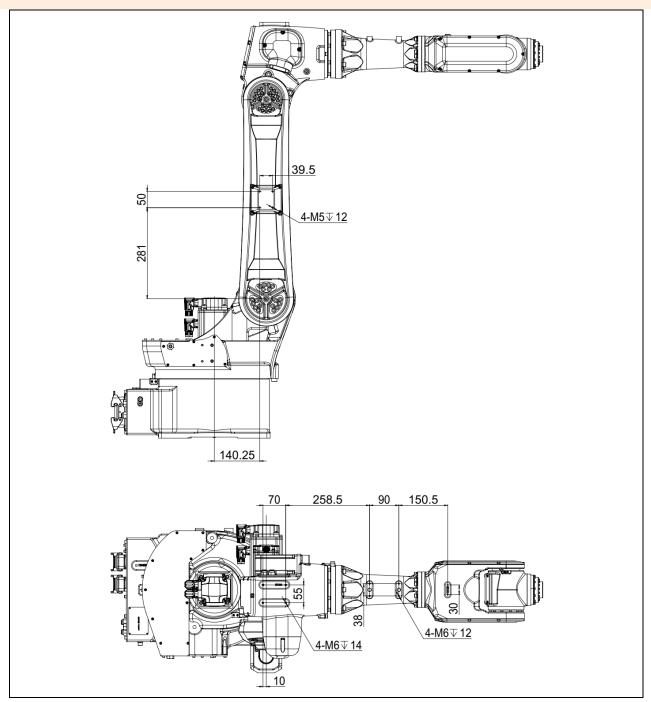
Equipment mounting face (QRC 305 Eco)
